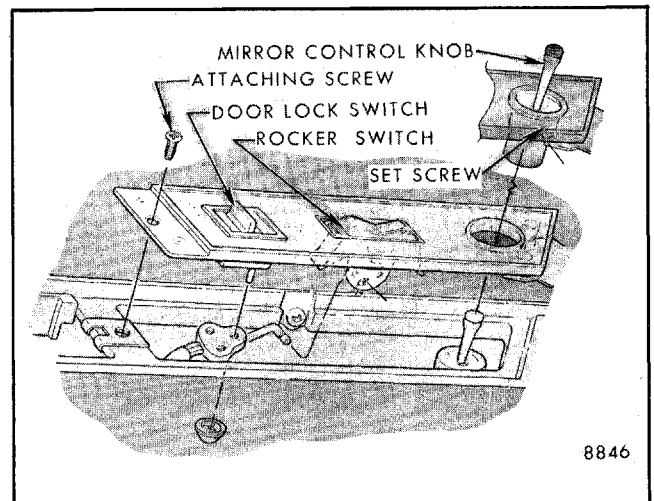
Door Armrest Cover and Remote Mirror Cable Attachment - "K" Styles
